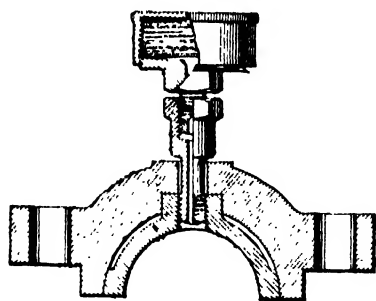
Stauffer Lubricator fitted to Bearing Cup
